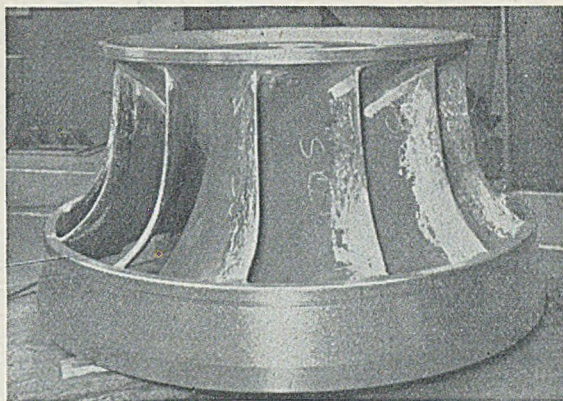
Francis Runner Crown Plate and Skirt Ring Casting with Vanes inserted by Welding.
